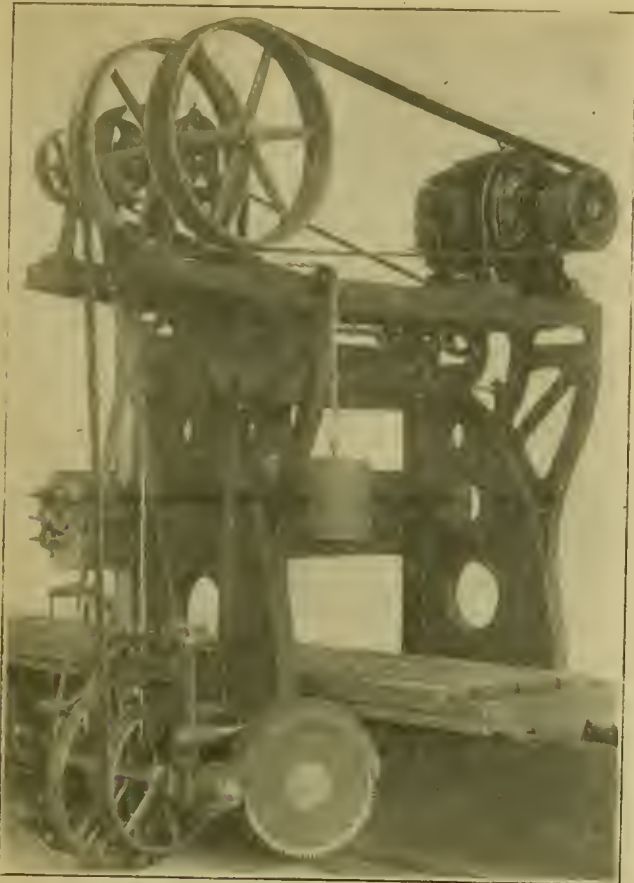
BELTED DRIVE UPON A GRAY PLANER—FLYWHEELS STILL RETAINED. JANTZ & LEIST CONSTANT-SPEED MOTOR.
